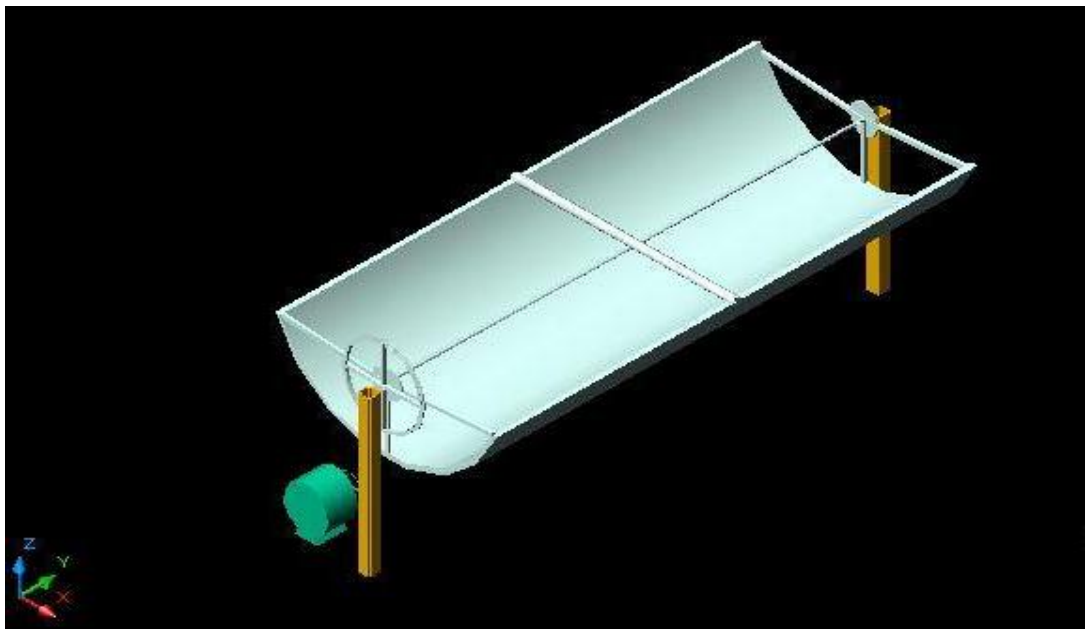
7 The actual drawing of parabolic trough collector made on AUTOCAD
